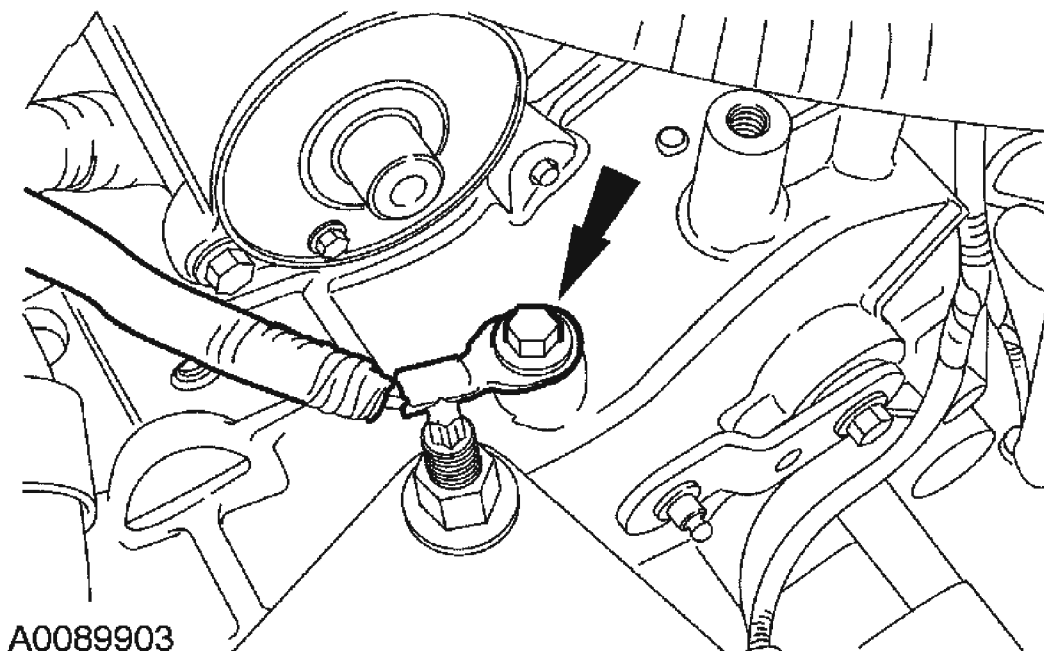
Removing Retaining Bolts From Shift Cable Bracket
